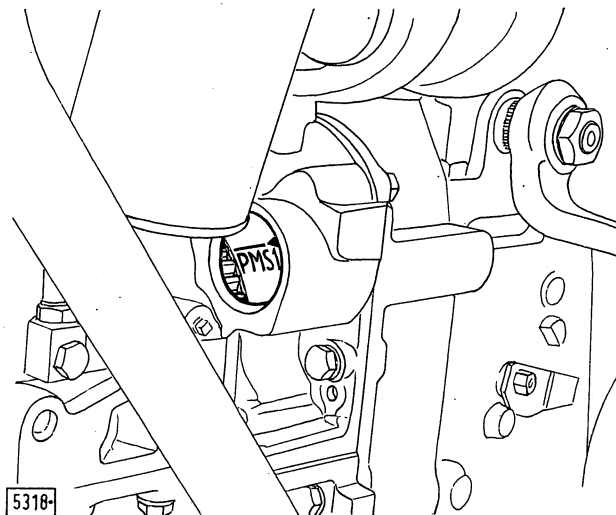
P.M.S. 1 mark on engine flywheel.
